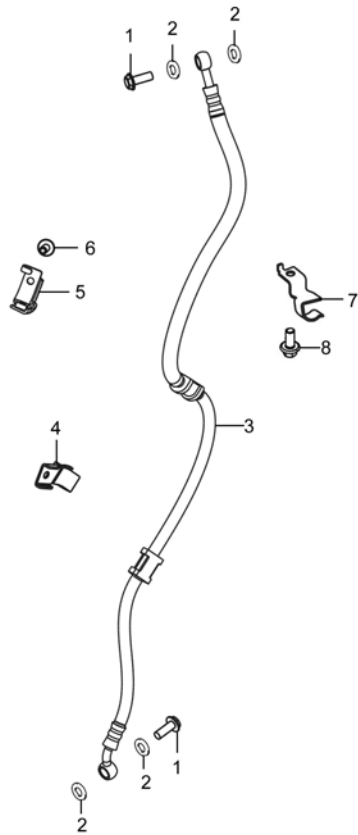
HOSE,FRONT BRAKE (P05-S435-0022)
